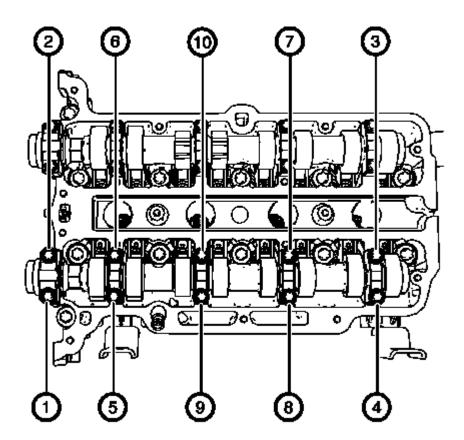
Intake Camshaft, Camshaft Bearing Caps And Bolts Courtesy of GENERAL MOTORS COMPANY
